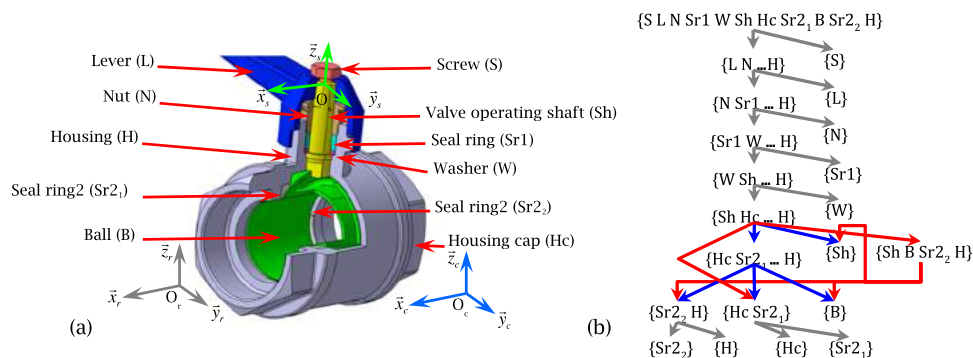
(a) CAD assembly model of a hydraulic gate valve with a partial cut showing internal components. The internal diameter of the nut and the diameter of the shaft are equal and express the contact and rotational movement between these two components. The gray, green, and blue frames are attached to assembly subsets. (b) Possible disassembly sequences with variants (blue and red).
